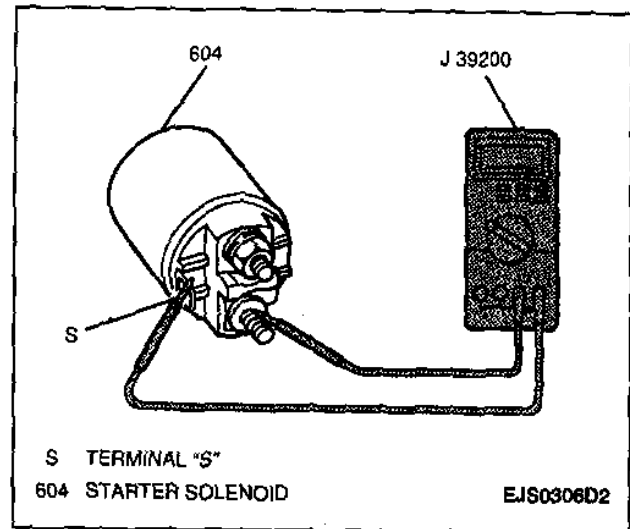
Measuring Starter Solenoid Hold-In Coil Resistance
